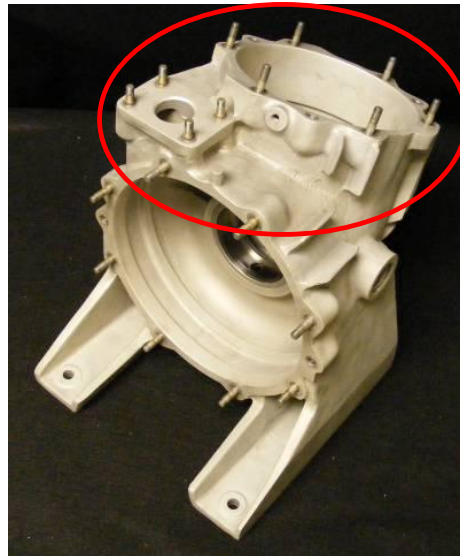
H-64 intermediate gearbox – top of housing contains 10 studs, 3 helicoil inserts, and steel liner in housing body.
